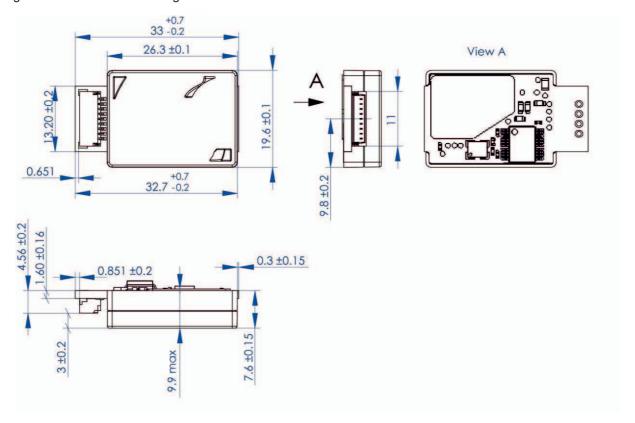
Mechanical drawing SenseAir® S8 Article No 004-0-0051
